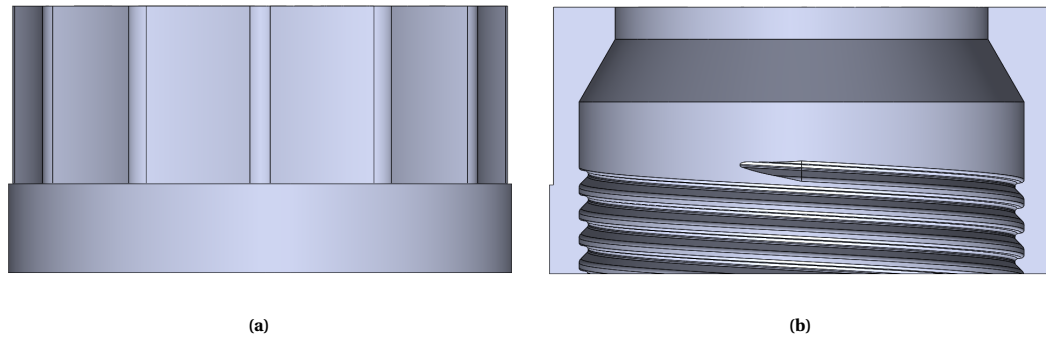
A side view (a) of the swivel cap, and a section view of the mid-plane (b) of the cap. The threads that are visible in subfigure 3.8b match the threading on the outside of the guide (figure 3.6).
